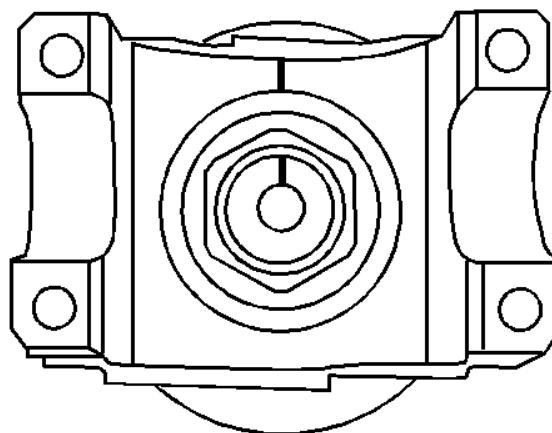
Pinion Shaft And Pinion Yoke Alignment Marks
